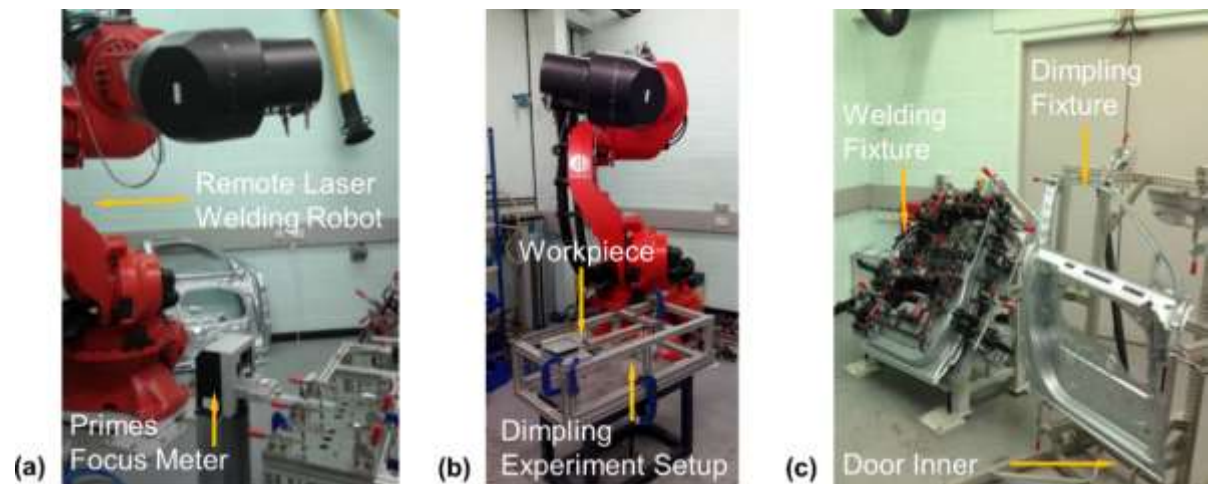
Overview of the experimental setup (a) Beam quality measurement (b) Laser Dimpling setup (first series of experiments) (c) Remote Laser Welding setup (second series of experiments)
